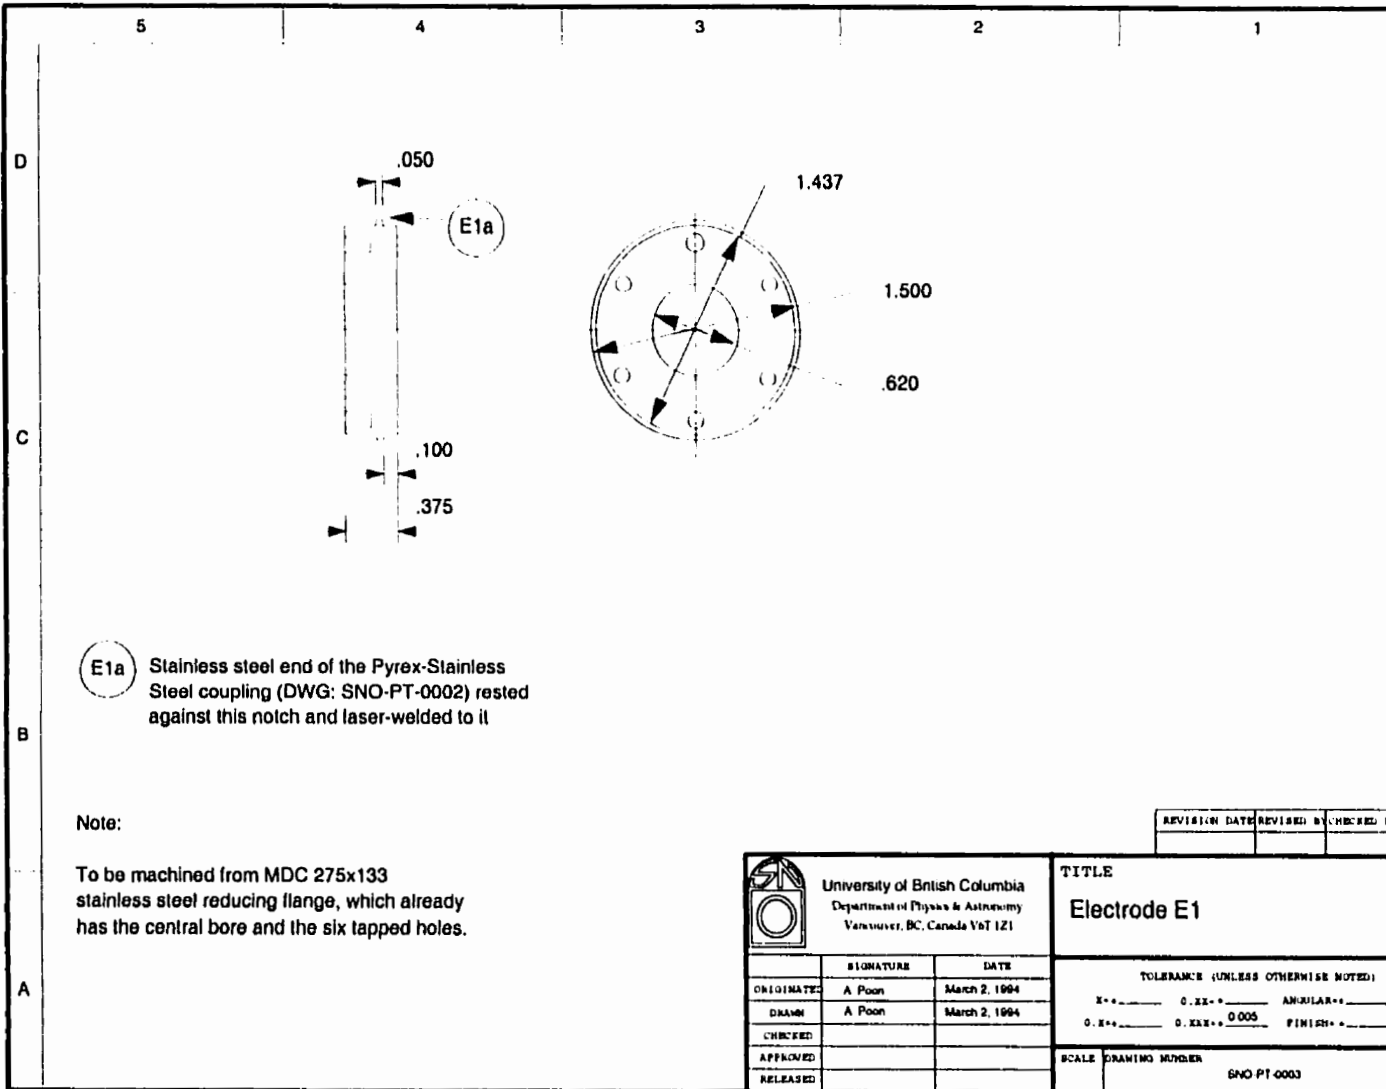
Technical drawing of the electrode E1 in the gas discharge line. (SNO-PT-0003).
